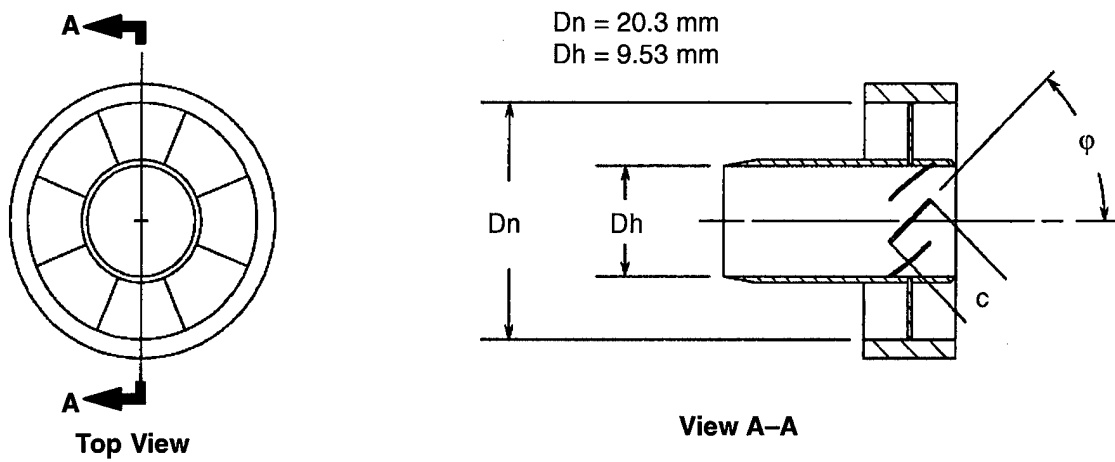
Plan and Cross Section Drawings of Flat Vane Swirler.
